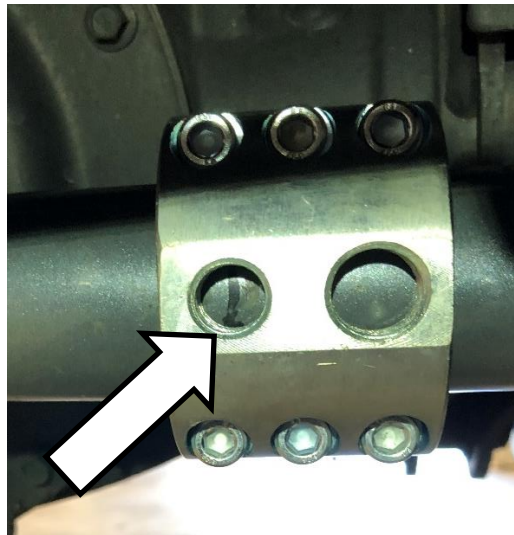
Driver Side Stabilizer Clamp Installed on the Tie Rod with 1/2" Mounting Hole Over the Mark Left from Step 9.
